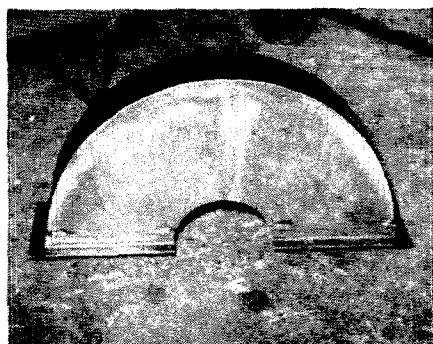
Steel designed gear case cover now used weighs only 10 pounds... costs half as much to produce. Fabricated entirely in the manufacturer's own shop by arc welding.
